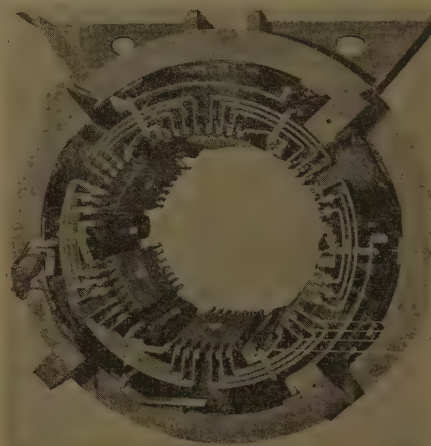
Stator of large generator containing flash-welded aluminum-copper joints. Arrows indicate one of 24 groups of welds; note bend near one weld
